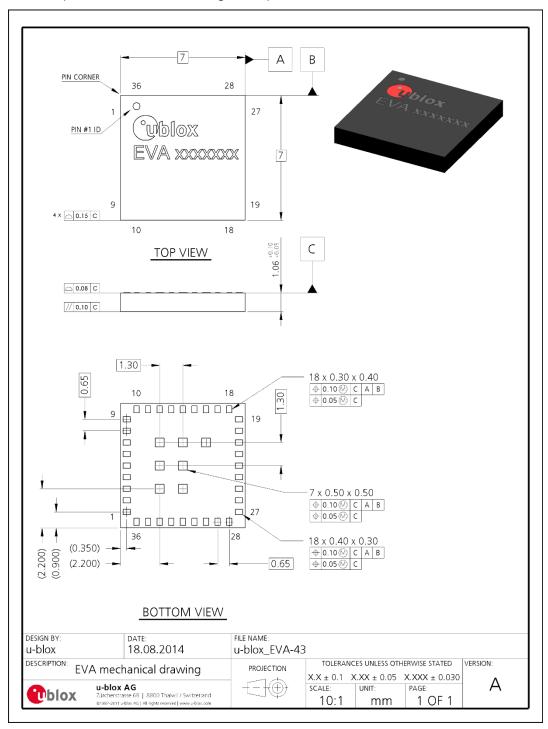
Mechanical drawing for EVA-M8M (LGA43)
